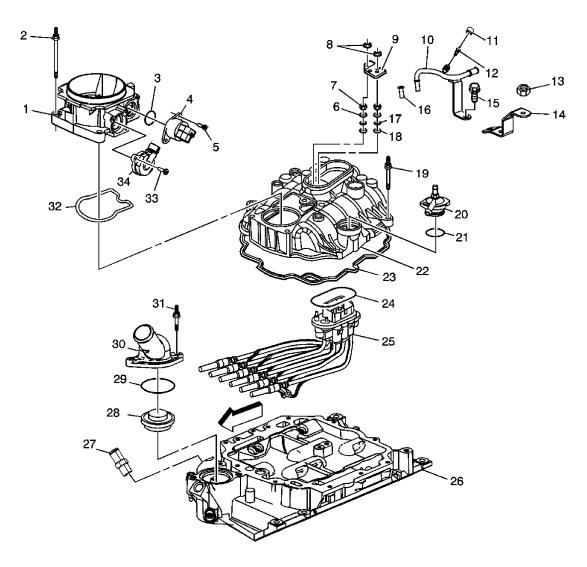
Upper and Lower Intake Manifold View Courtesy of GENERAL MOTORS CORP.
